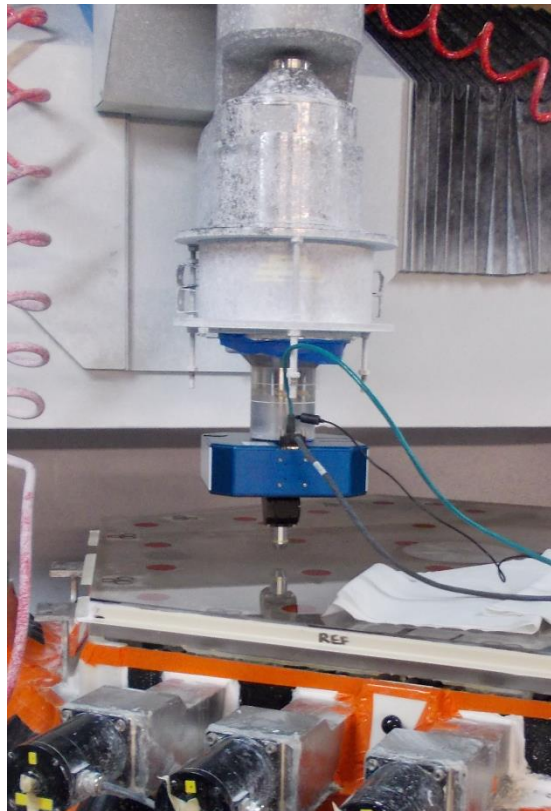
STA mounted on the IRP1600 machine and while testing a prototype ESO E-ELT segment at OpTIC Glyndwr, North Wales
